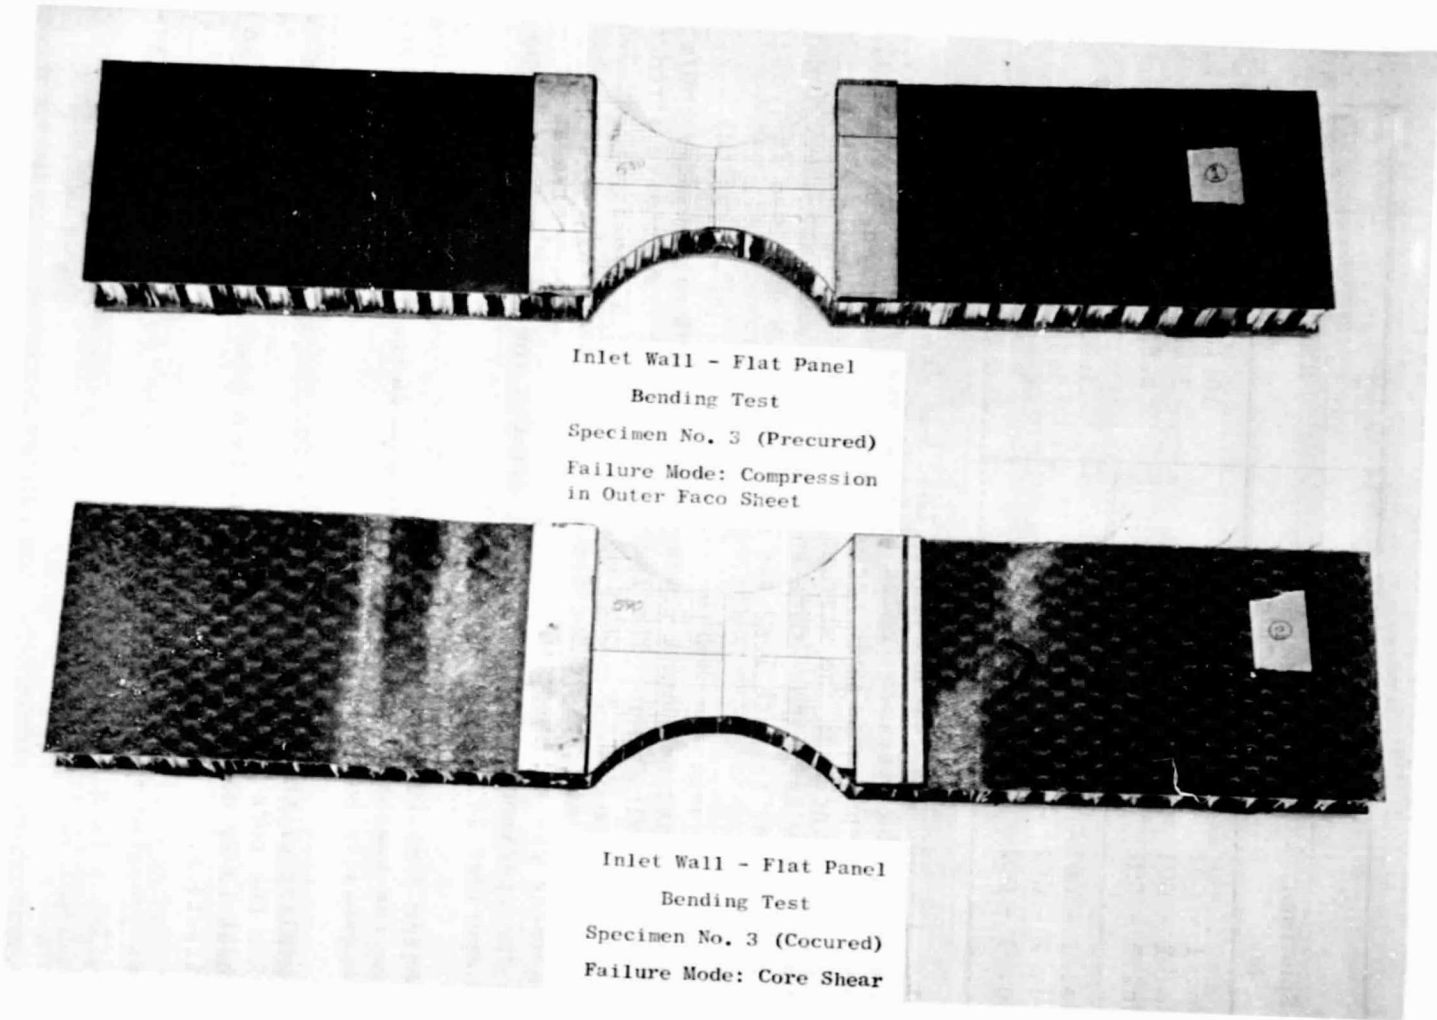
Inlet Wall Flat Sandwich Beam Specimens.
